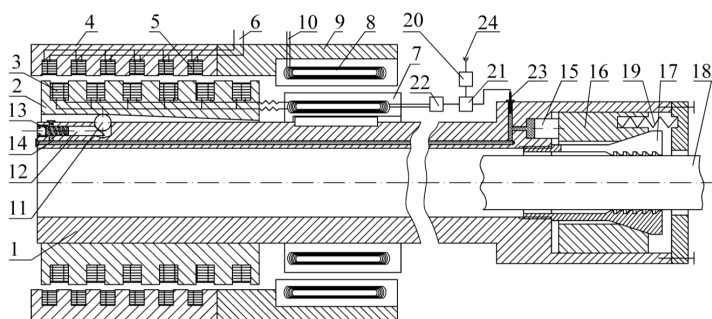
Automatic clamping mechanisms as part of the spindle assembly of the machine according to the structure (3)
